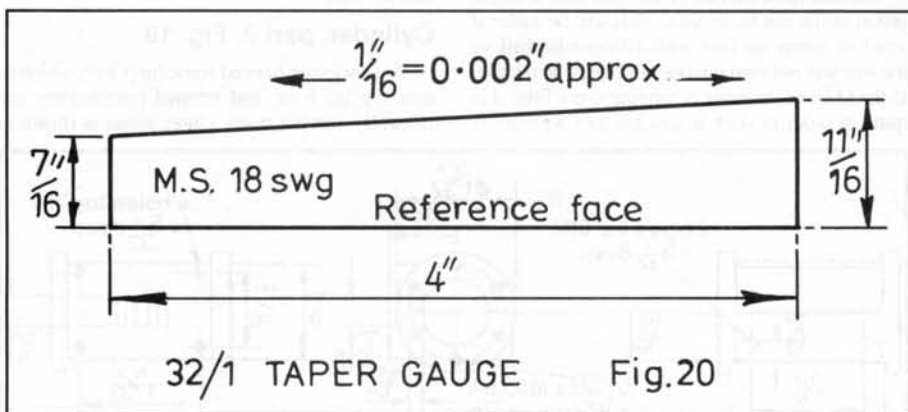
This is a piece of fairly stiff sheet, 18 or 20 s.w.g. (0.048 or 0.036in.) thick, but it must be flat. Extreme accuracy is not needed, but the taper shown gives a "magnification" of 32/1, so that $\frac{1}{32}$ in. along the sloping side is very nearly 0.02in. across the taper. Check with your micrometer, and make a cross-mark at 0.625in.; this is the nominal bore of the cylinder. In use, the "reference face" is held against one side of the bore as the taper is plunged in. You can then judge how much more needs to come off after each cut.
